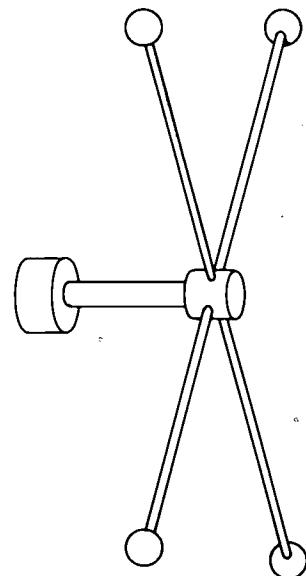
Recommended Changes to RCP Seal Handling Tool
